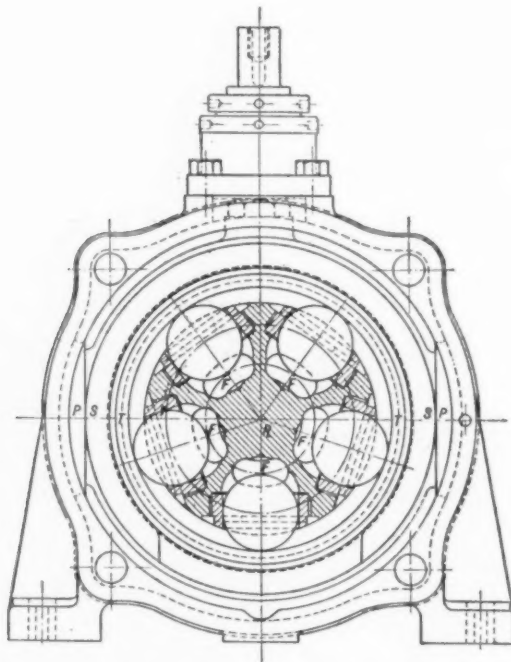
CROSS-SECTION OF ROTOR OF THE CAREY PUMP
